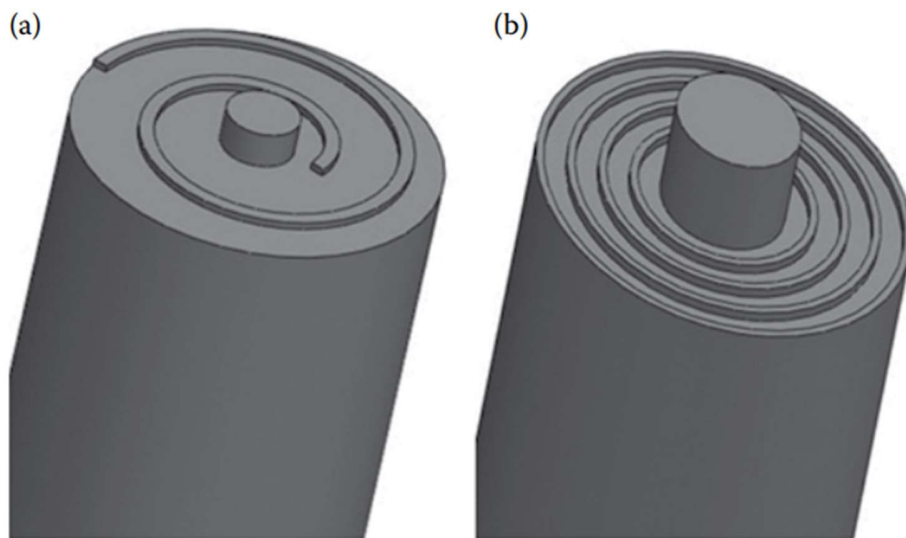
FSW tool shoulder designs:(a) scroll and (b) concentric.
